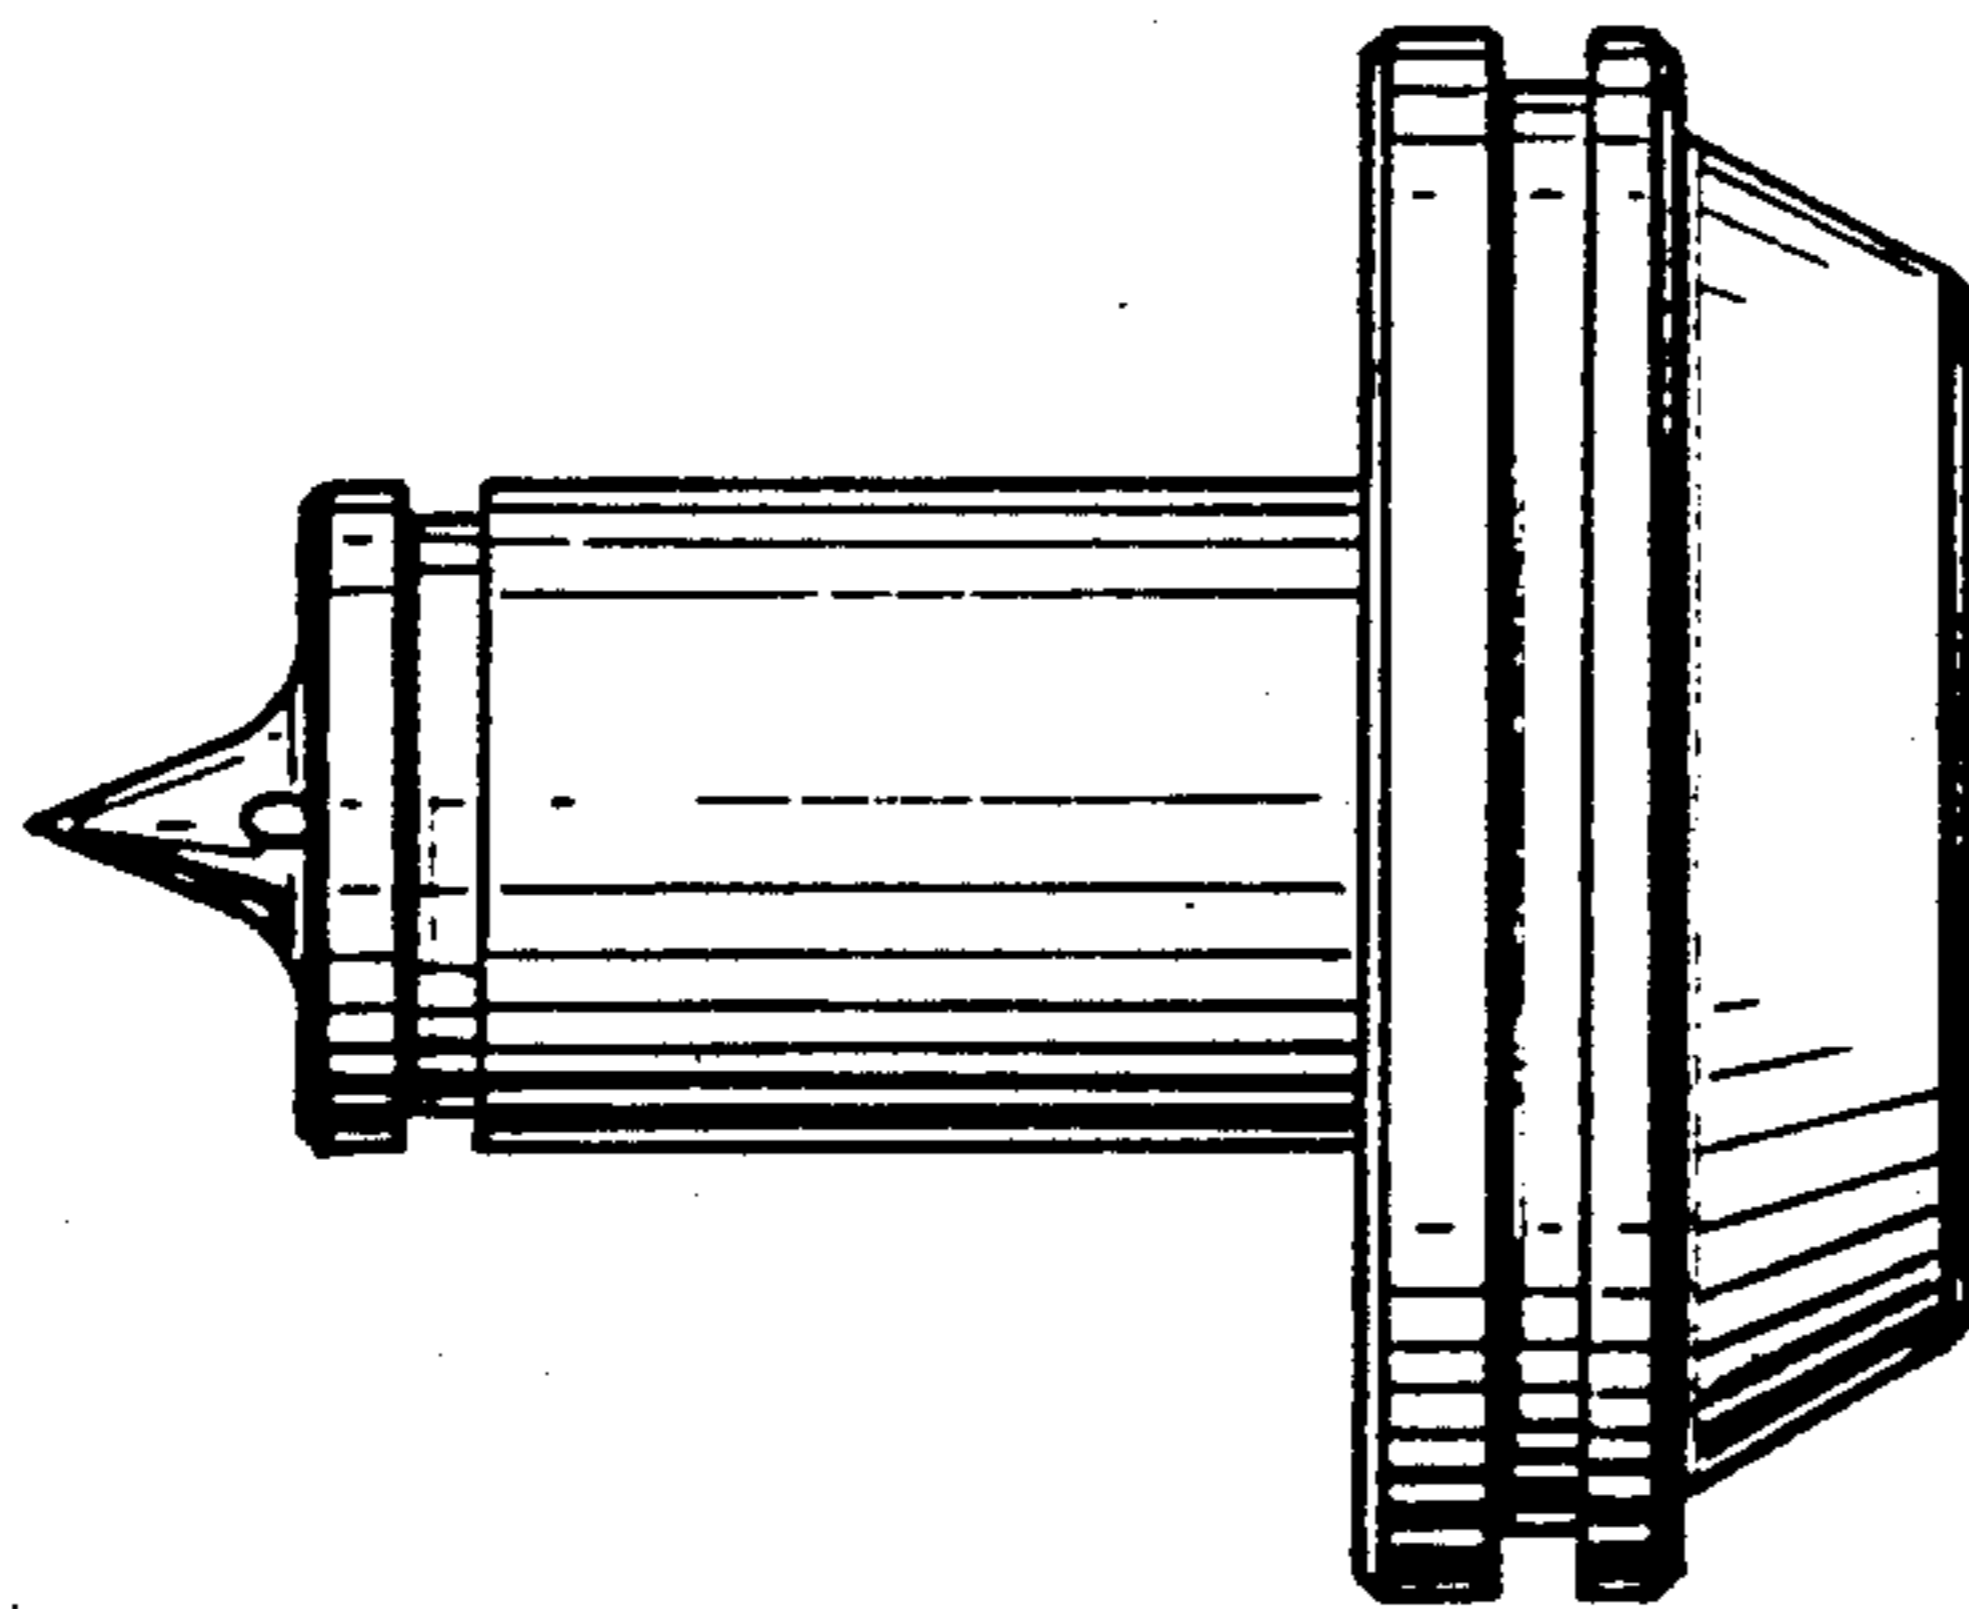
is a side elevational view of a unitary hot sprue bushing showing my new design;
